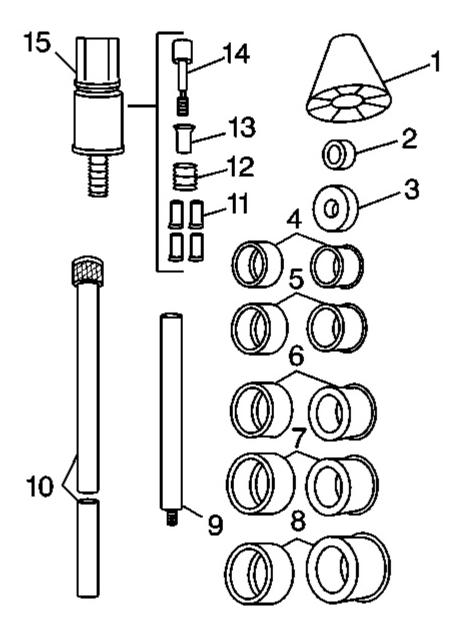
View Of J 33049 Camshaft Bearing Service Kit Components
